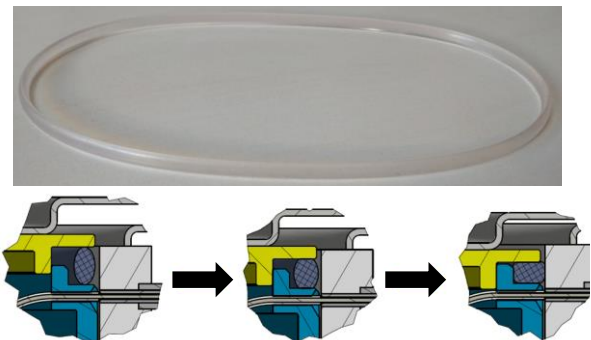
The silicon O-ring (top) and a deforming mechanism of the O-ring if a thinner wafer is present (bottom).
